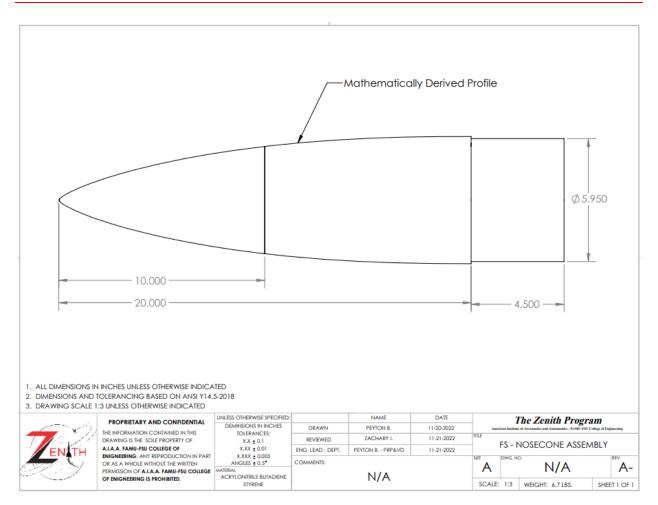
LD-Haack Nosecone Assembly CAD Drawing
